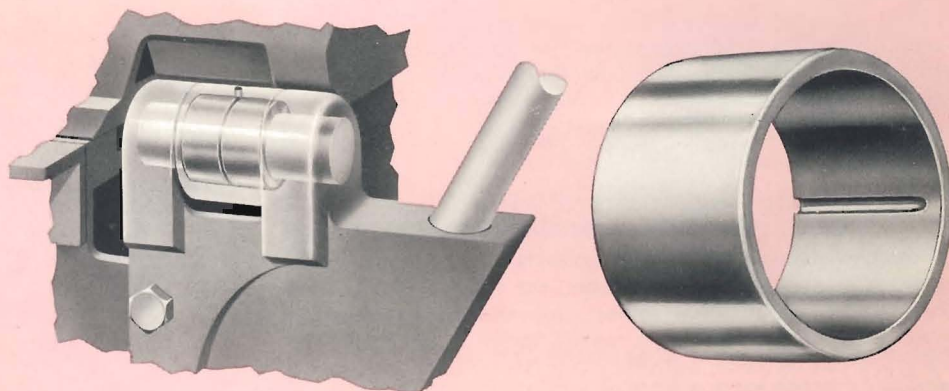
Cutaway view illustrates dual bearings mounted in end housings of all CHICAGO bending brakes for smooth, easy operation of the bored-in-line bending leaf. Closeup photo at right shows precision bearing with oil groove.
